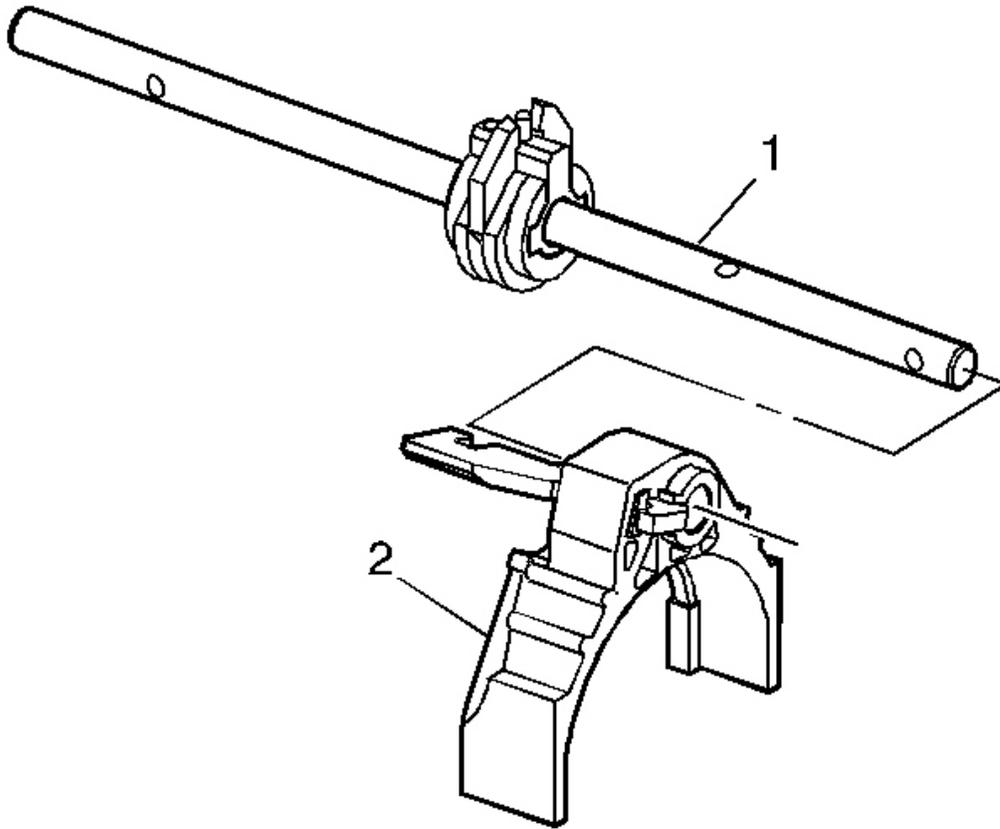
Identifying 3rd/4th Shift Fork & Shift Shaft
